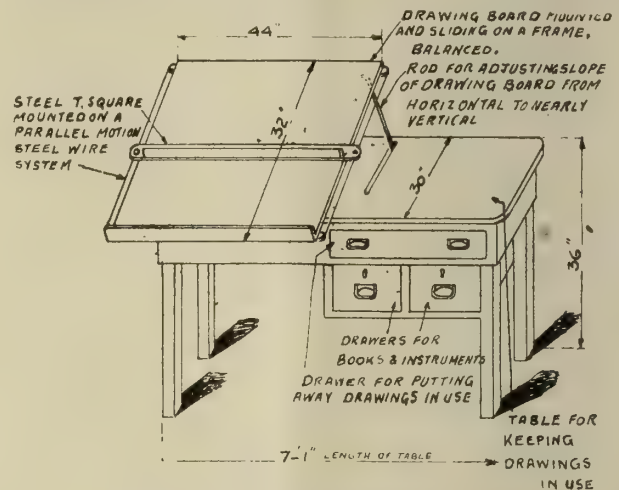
THE ADJUSTABLE DRAWING TABLE
